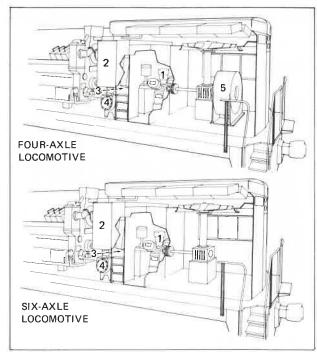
NO. 2 END EQUIPMENT ARRANGEMENT.
